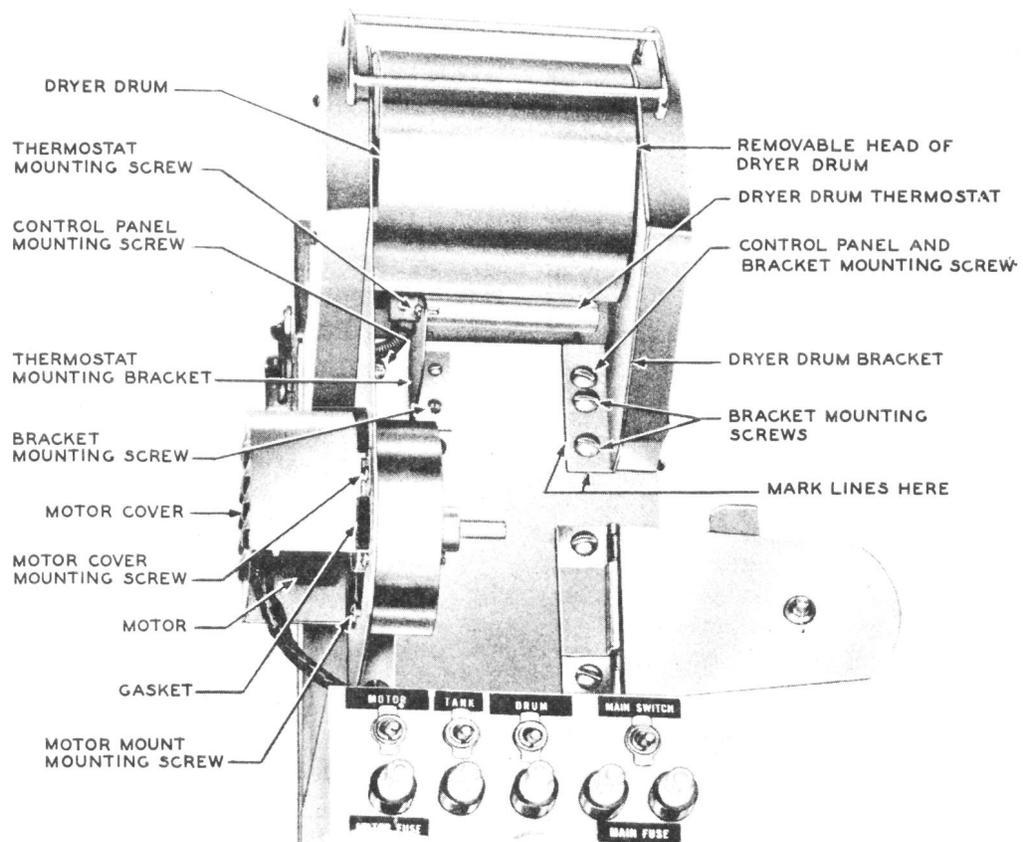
KS-14778 Photo Processor — Partial View Showing Motor and Associated Parts
